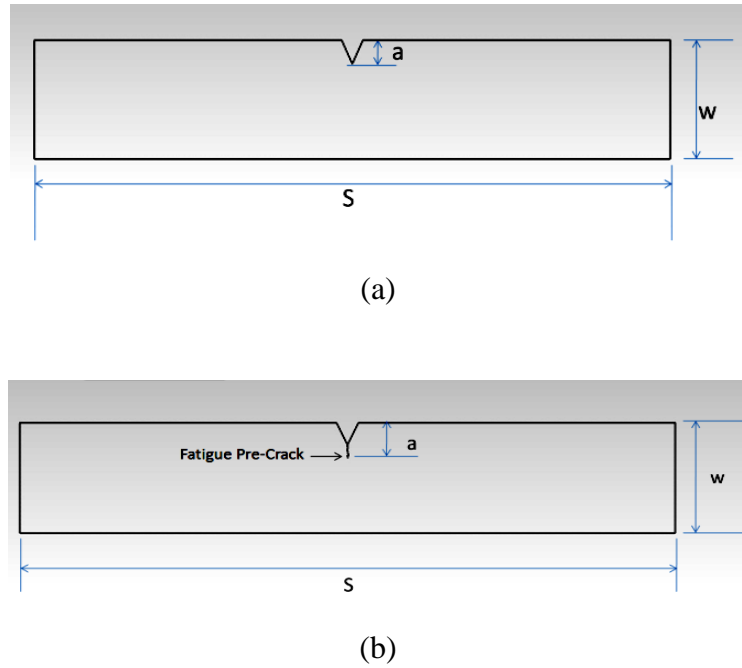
Specimen Criteria: a) Without fatigue Pre-Crack, b) With Fatigue Pre-Crack
